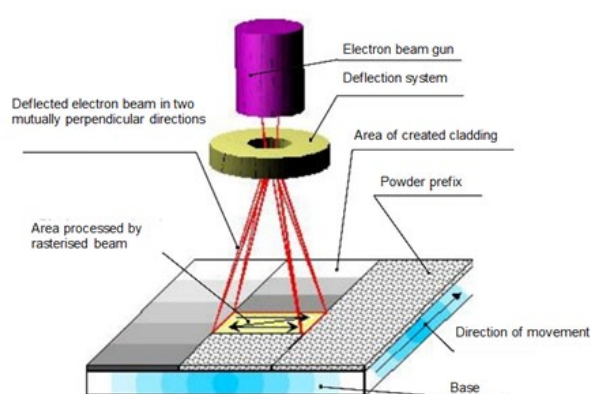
Principle of processing (remelting) of the sprayed layer by electron beam
